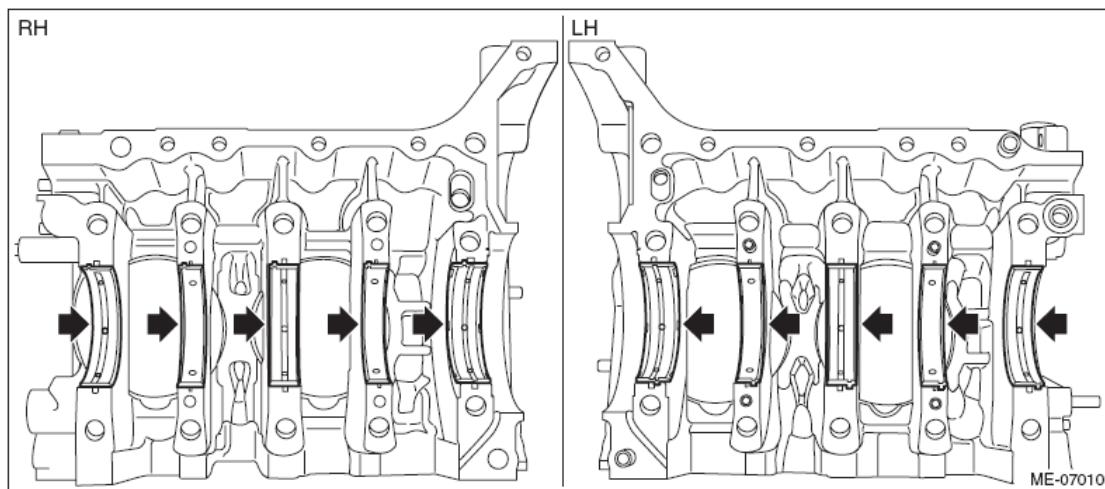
Checking Oil Clearance On Crankshaft Bearing Using Plastigauge
